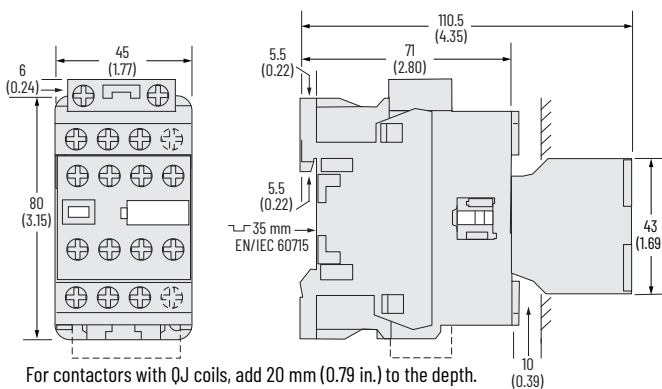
100-E09...100-E16 Contactors with Standard Coils and Side-mounted Auxiliary Contact
